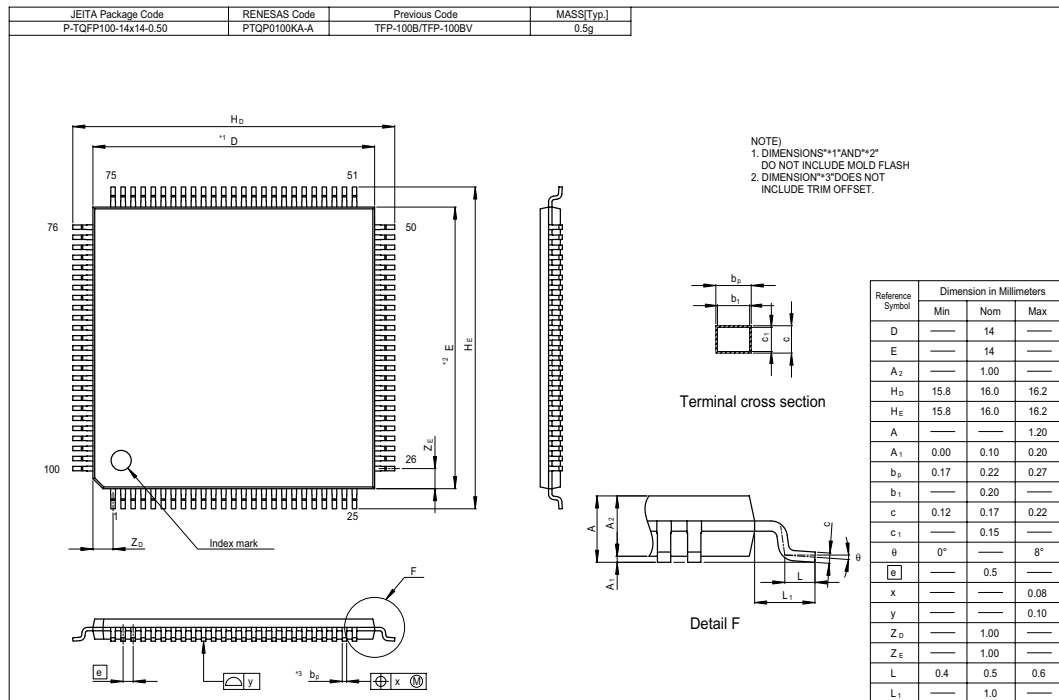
TFP-100B Package Dimensions (H8S/2268 Group Only)
